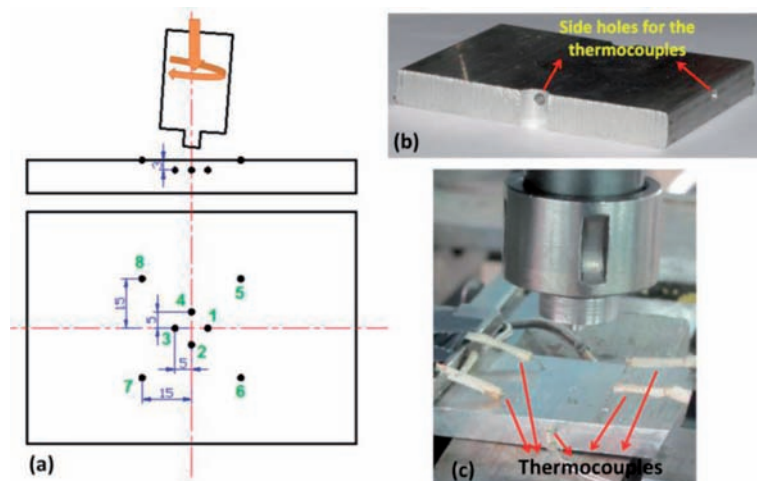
(a): the location of the thermocouples during the welding process, (b): workpiece with side holes for thermocouples, (c): thermocouples in the experimental procedure
